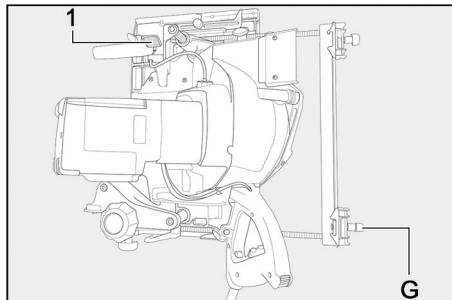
Placing the machine with parallel guide fence and adapter pair
